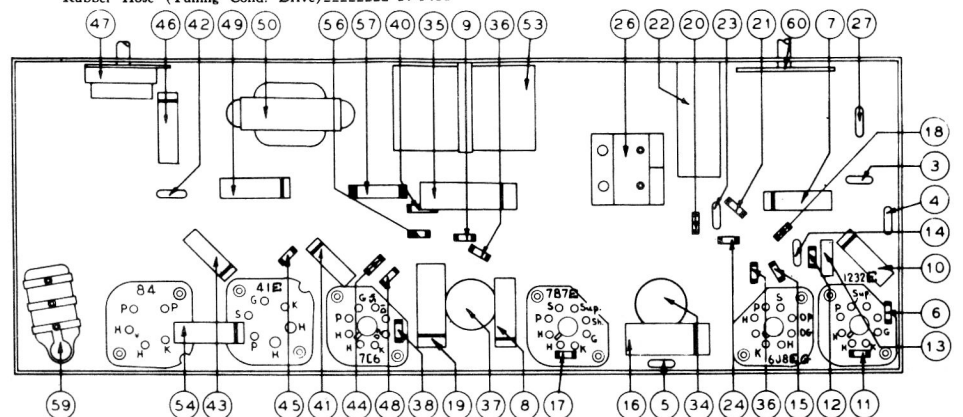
PART LOCATIONS, UNDERSIDE OF CHASSIS.
